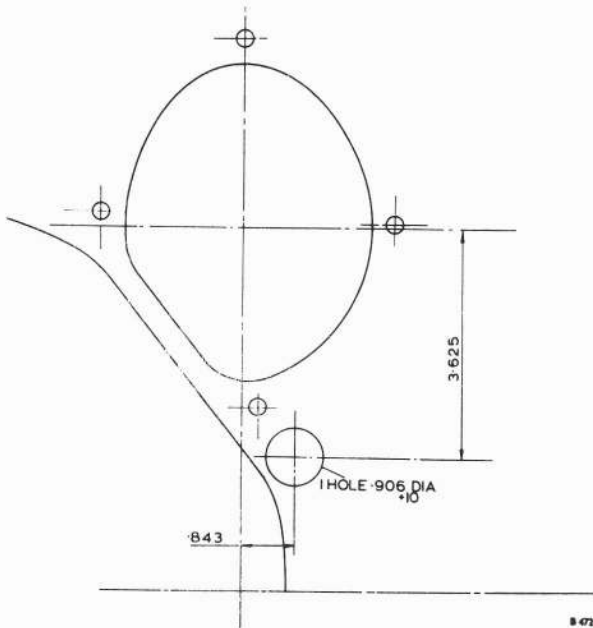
Dimensions for drilling grommet hole in boot floor.
